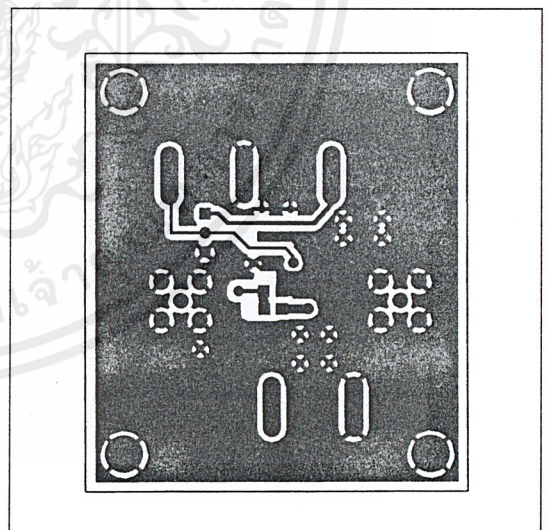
MAX477 EV Kit PC Board Layout—Solder Side
